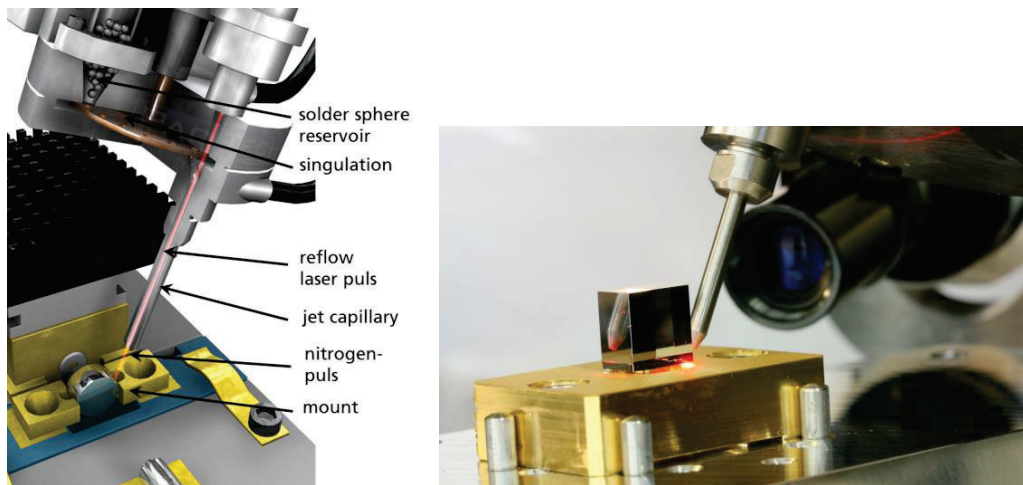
(Left) Solderjet-bumping process schema and (right) during the soldering of a mirror. [1]
